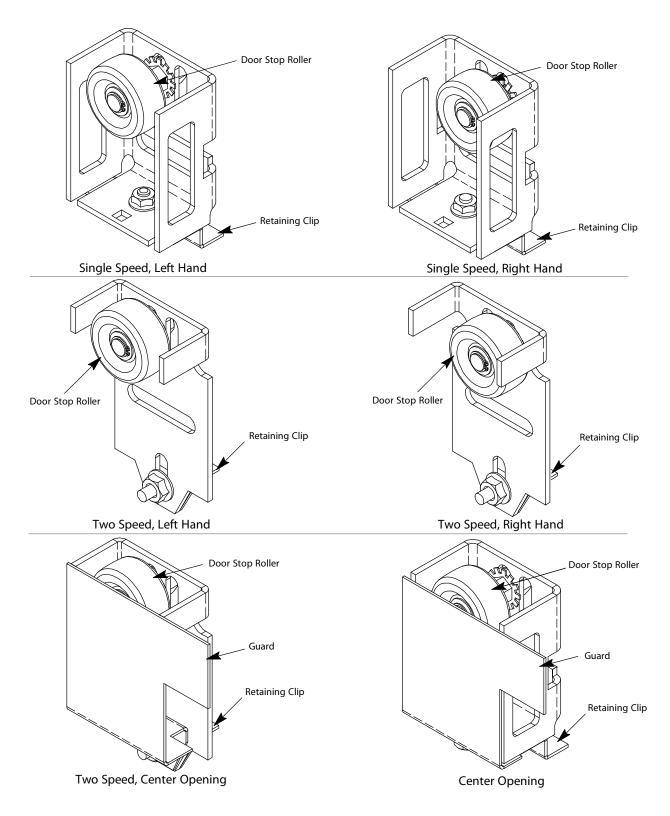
Loosen Door Stop Retaining Clip Fasteners
